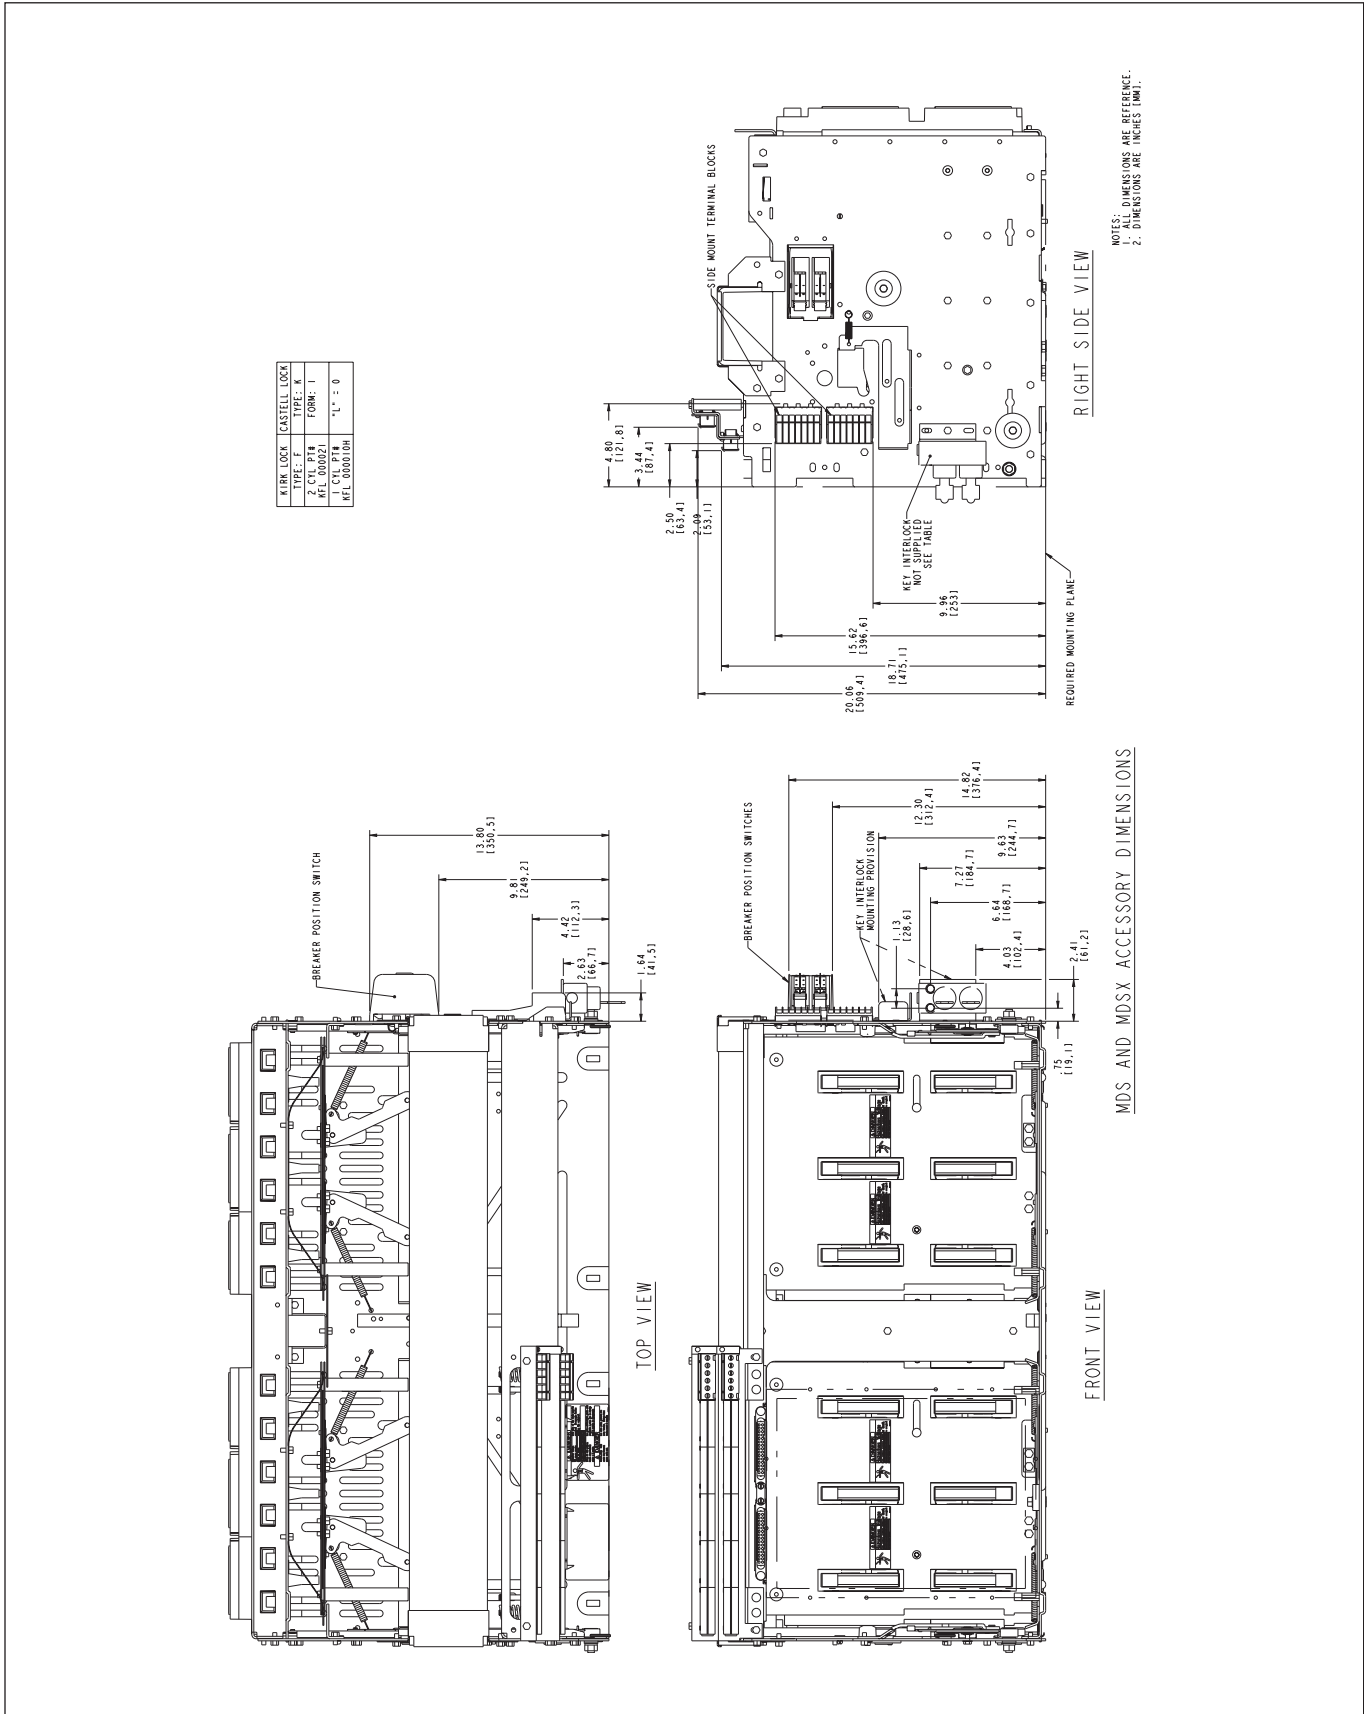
4000-5000A Double-wide frame universal Cassette (3-pole horizontal stabs)
